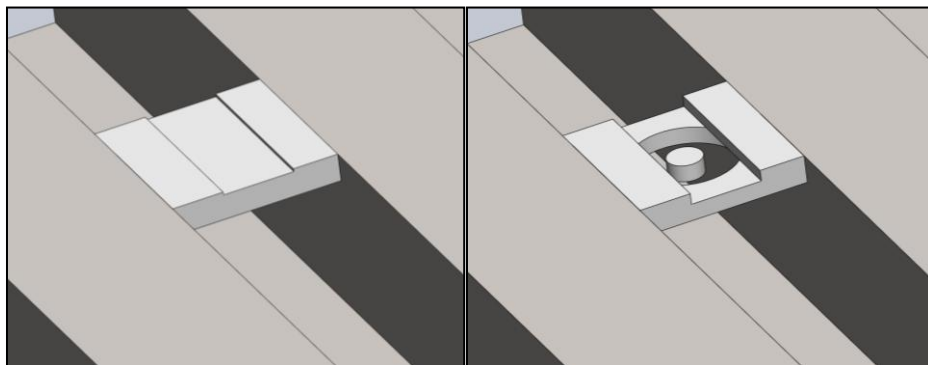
Excess material is removed using a 0.75 in mill bit until the slot drops free.
